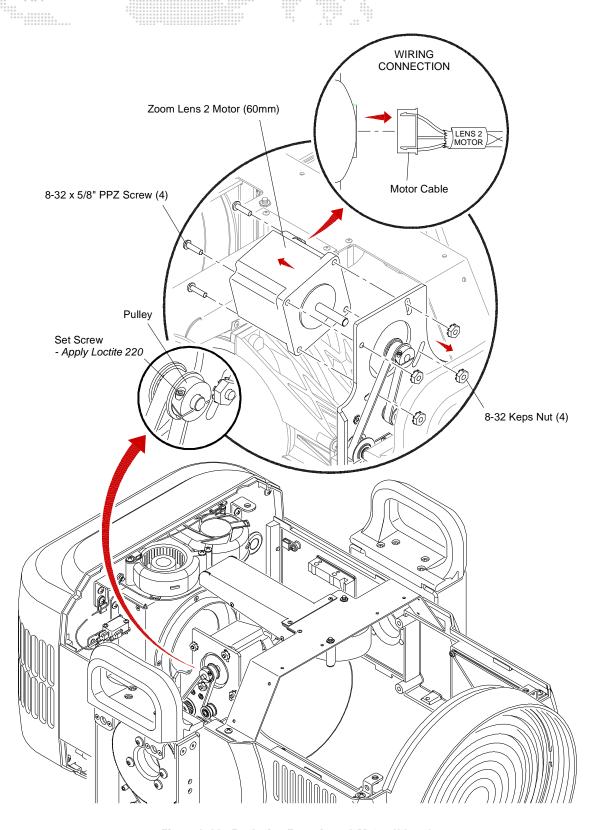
Replacing Zoom Lens 2 Motor (60mm)
